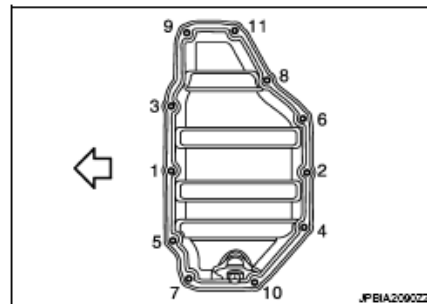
Identifying Oil Pan Mounting Bolts Loosening Sequence
